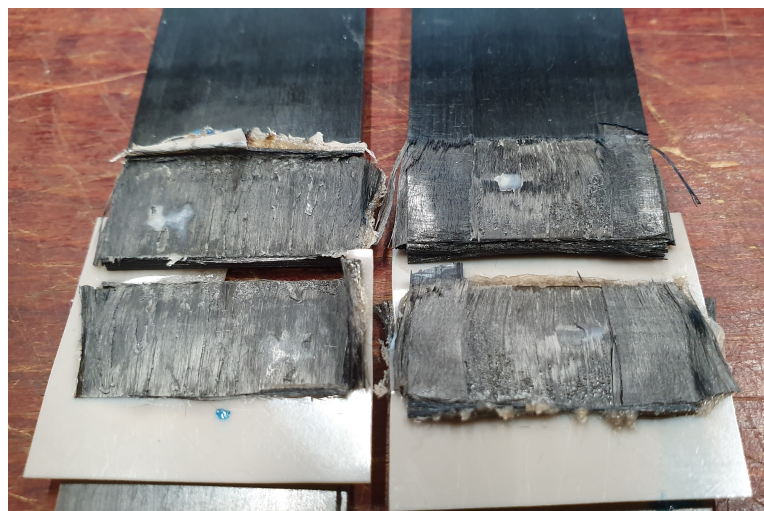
Fracture surface of welded joints using H parameters (left) and L parameters (right).
